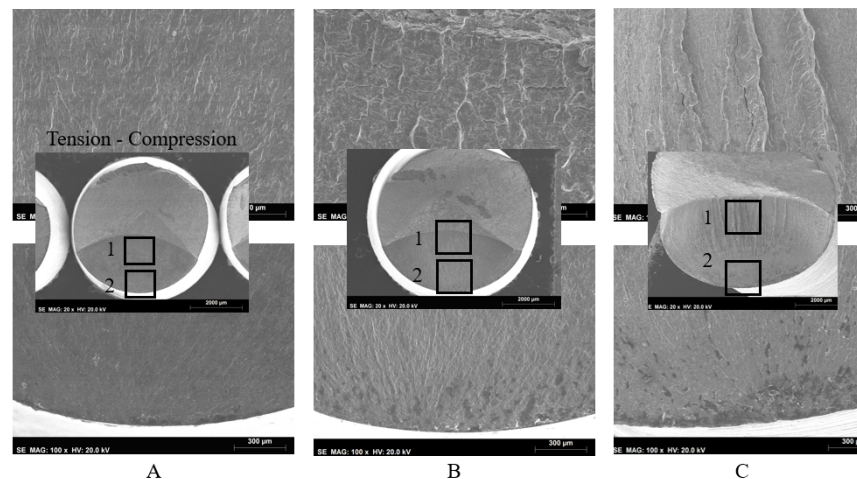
Fatigue fracture surface comparison between ultrasonic fatigue (A) Tension-compression; (B) Tension-torsion; (C) Torsion-torsion.
